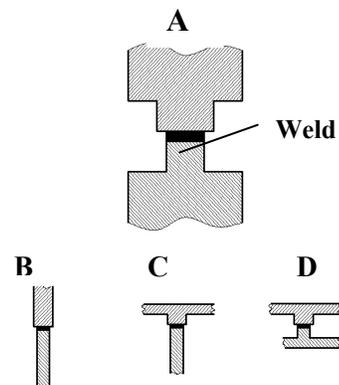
Welded joint design principles (types and configuration). Legend: A – joint design; B – butt joint (straight); C – butt joint (T – shape); D – shear / lap joint
